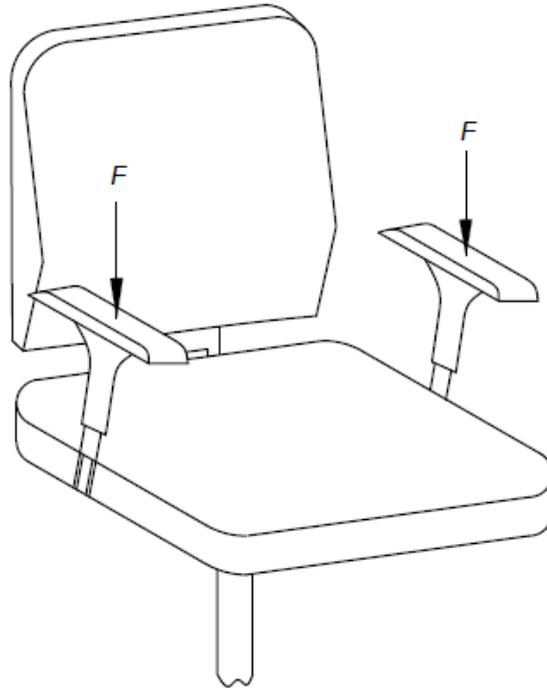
ARM REST DOWNWARD STATIC-LOAD TEST – CENTRAL
